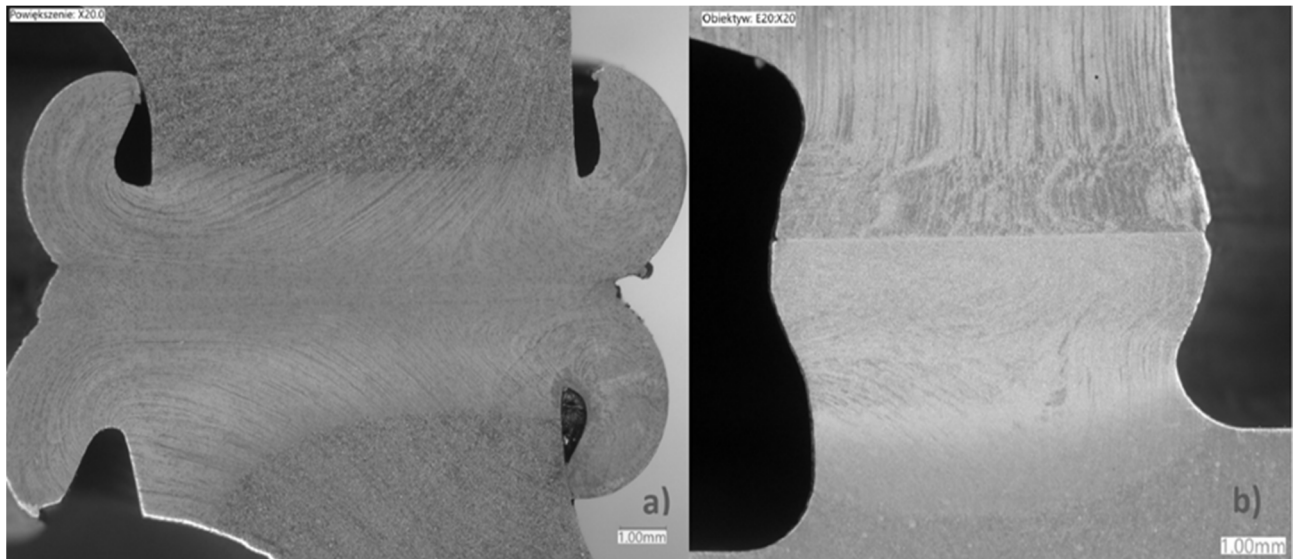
The shape of the flash formed by welding a) rotary butt welding, b) with low force
